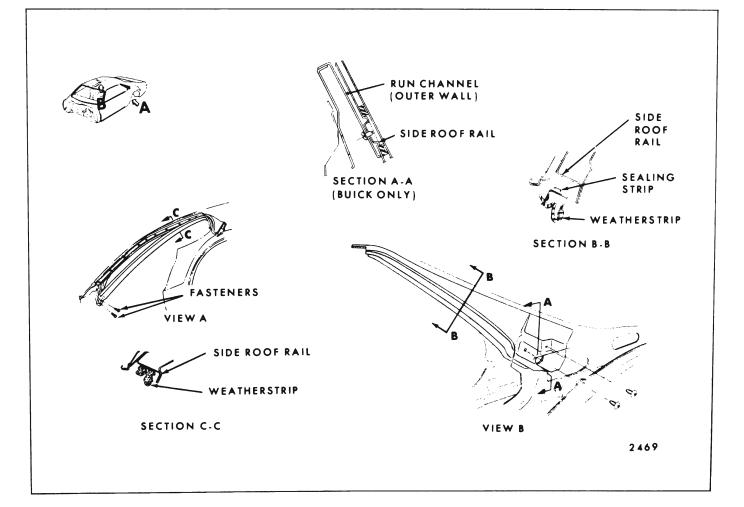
Side Roof Rail Weatherstrip Assembly - "E-87" Styles
